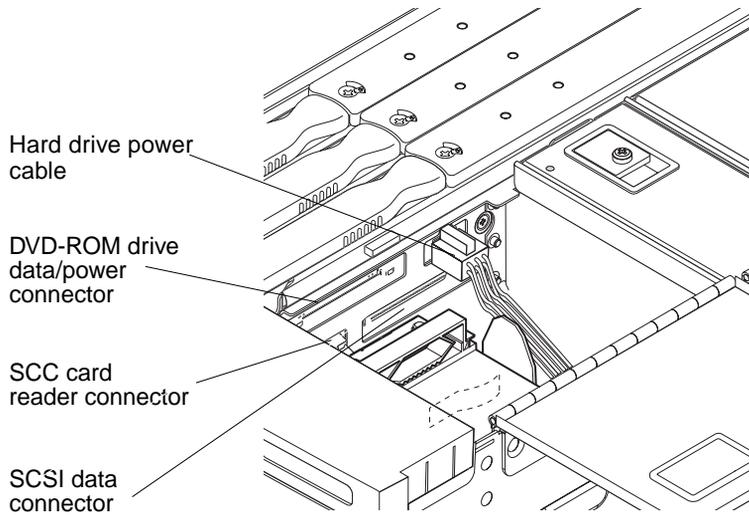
IB_SSC Assembly Cable and Connector Locations
